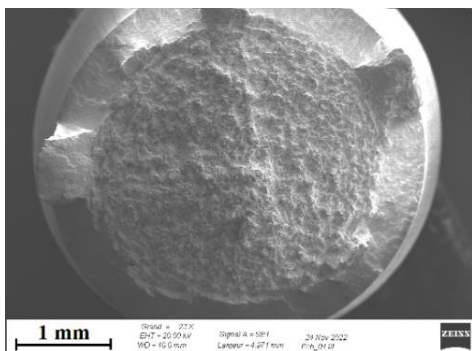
Fracture surface of the optimal Ti6Al4V weld joint.
